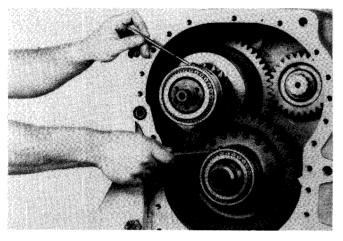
Use caution as not to lose low (1st) and idler bearing lock balls. A light coat of grease will hold lock balls in place.
